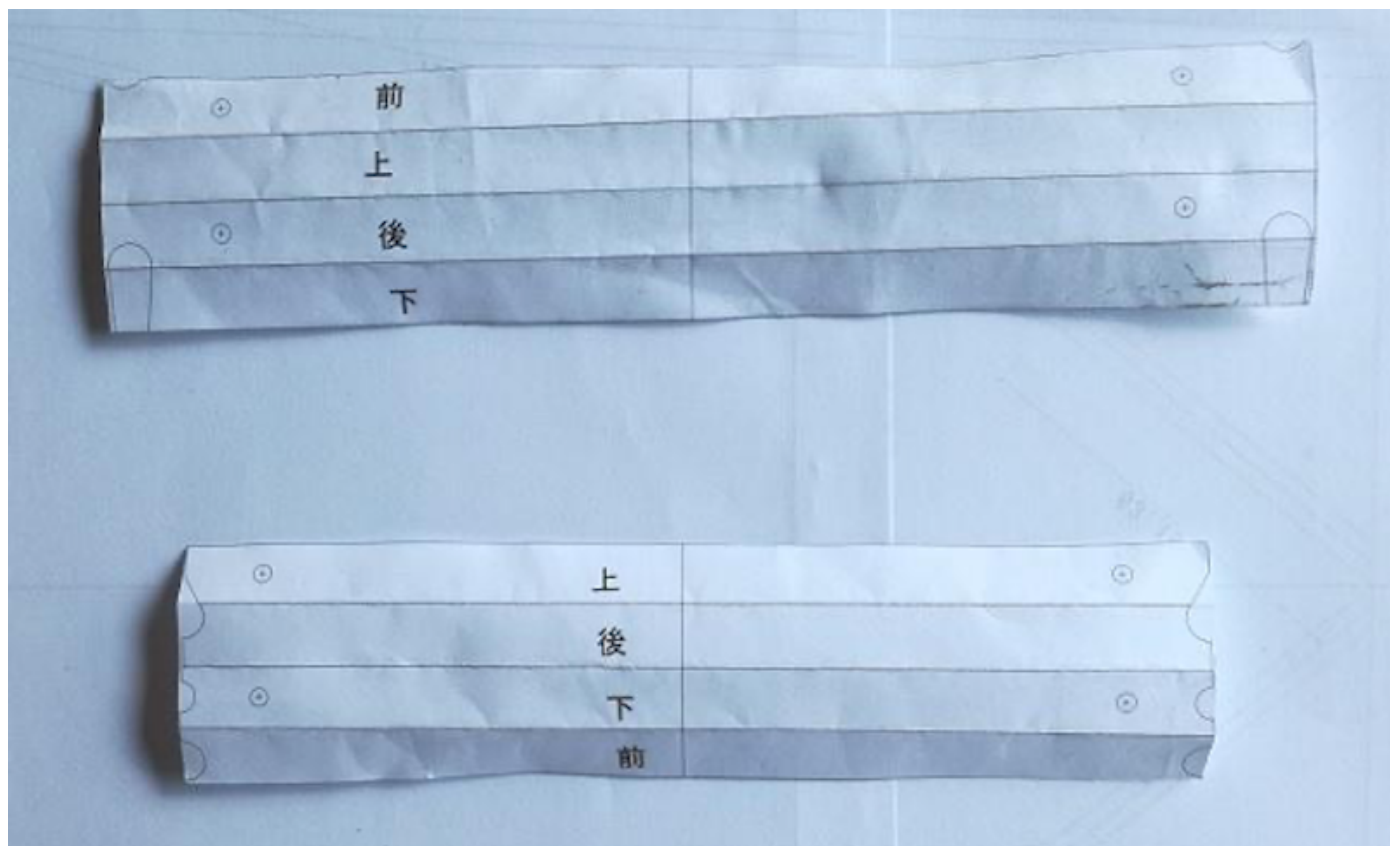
Development view drawings of the main wing attachment crossbeams cut out.
